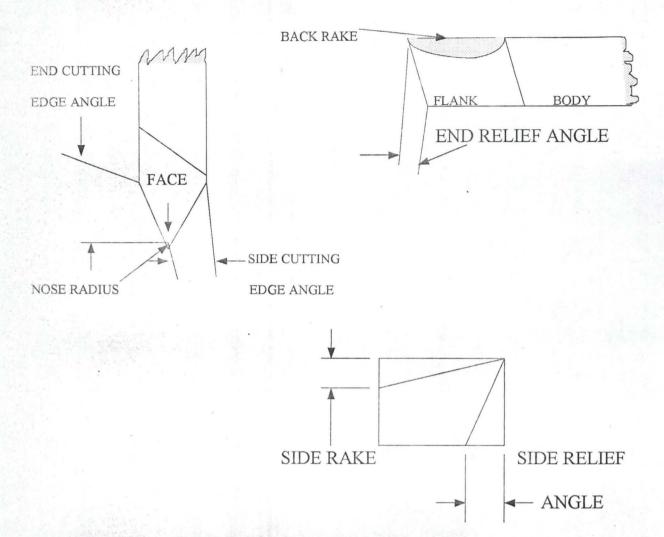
THE PARTS AND ANGLES OF A TOOL
